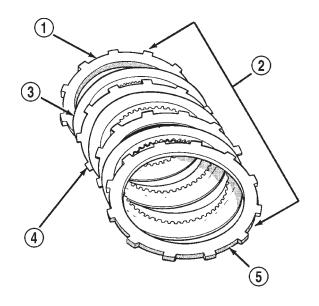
Overdrive Clutch Pack Removal 1 – OVERDRIVE CLUTCH PACK
